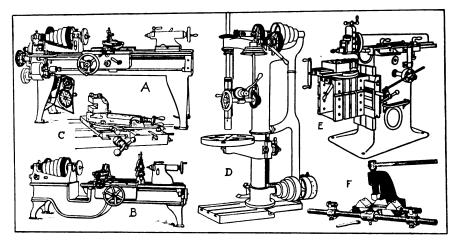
PRACTICAL MACHINE TOOLS FOR AUTO REPAIRING. A—SCREW CUTTING ENGINE LATHE. B-GAP BED LATHE. C-COMPOUND REST FOR LATHE. D-BACK GEARED DRILL PRESS. E-SHAPER. F-SHAFT STRAIGHTENING PRESS.
